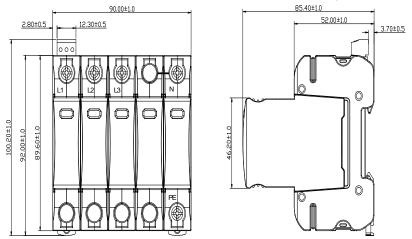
Dimensions of VPM1000-50/3N+NPG(T1+T2) (unit: mm)
